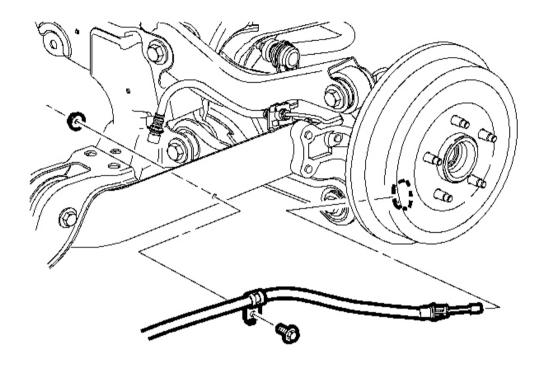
Removing/Inserting Cable Through The Opening Of Vehicle Underbody Courtesy of GENERAL MOTORS CORP.
